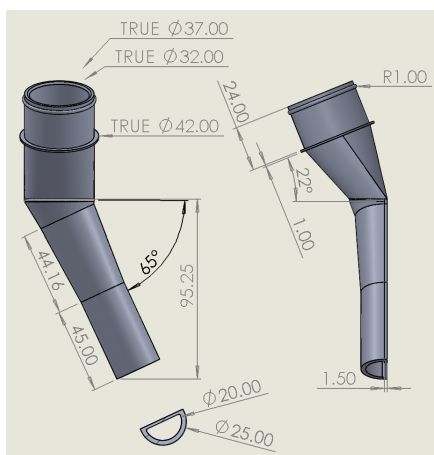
The SolidWorks design drawings for the 20 mm nozzle at angles $65^\circ/115^\circ$ with dimensions in mm.
